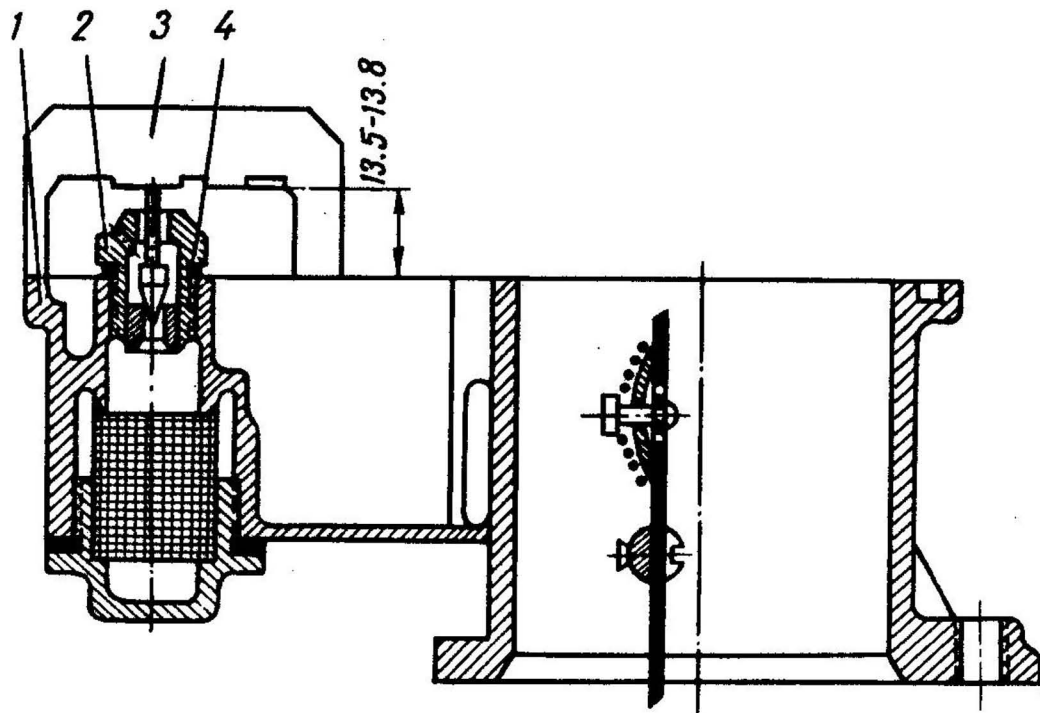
NEEDLE VALVE ADJUSTMENT CHECK
